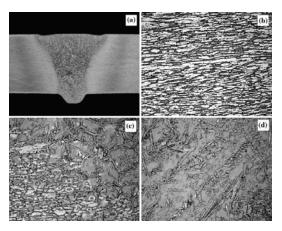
Macro and microphotographs of Weld 1:(a) macro (b) Base Metal (c) HAZ and(d) Weld Metal [42]
